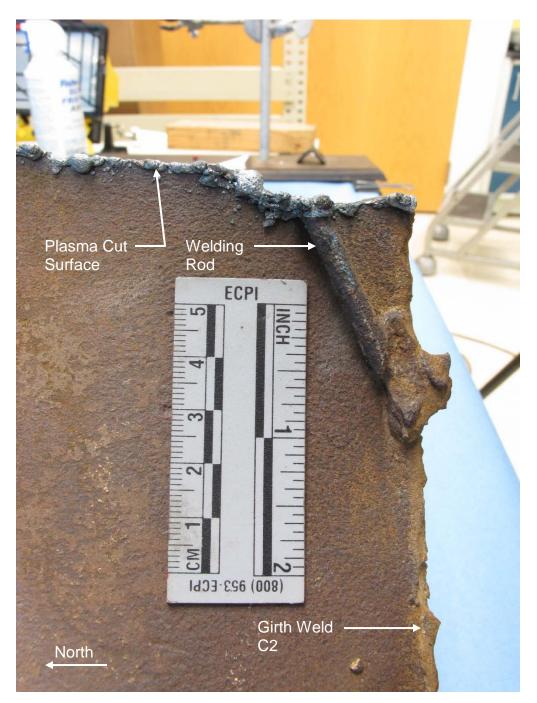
Laboratory photo showing length of welding rod fused to the inside of the C2 girth weld on the inner diameter of pup 2.
